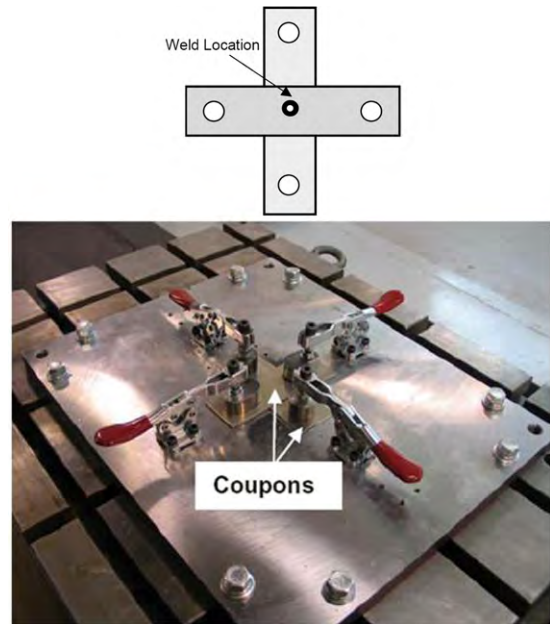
Welding jig with a coupon in a cross-tension configuration.
